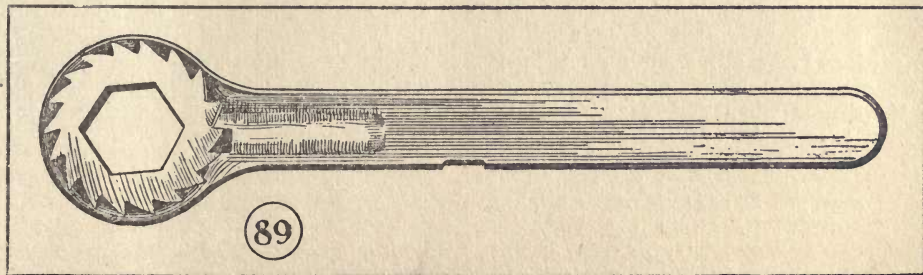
Reverse and brake pedal tension spring ratchet wrench
